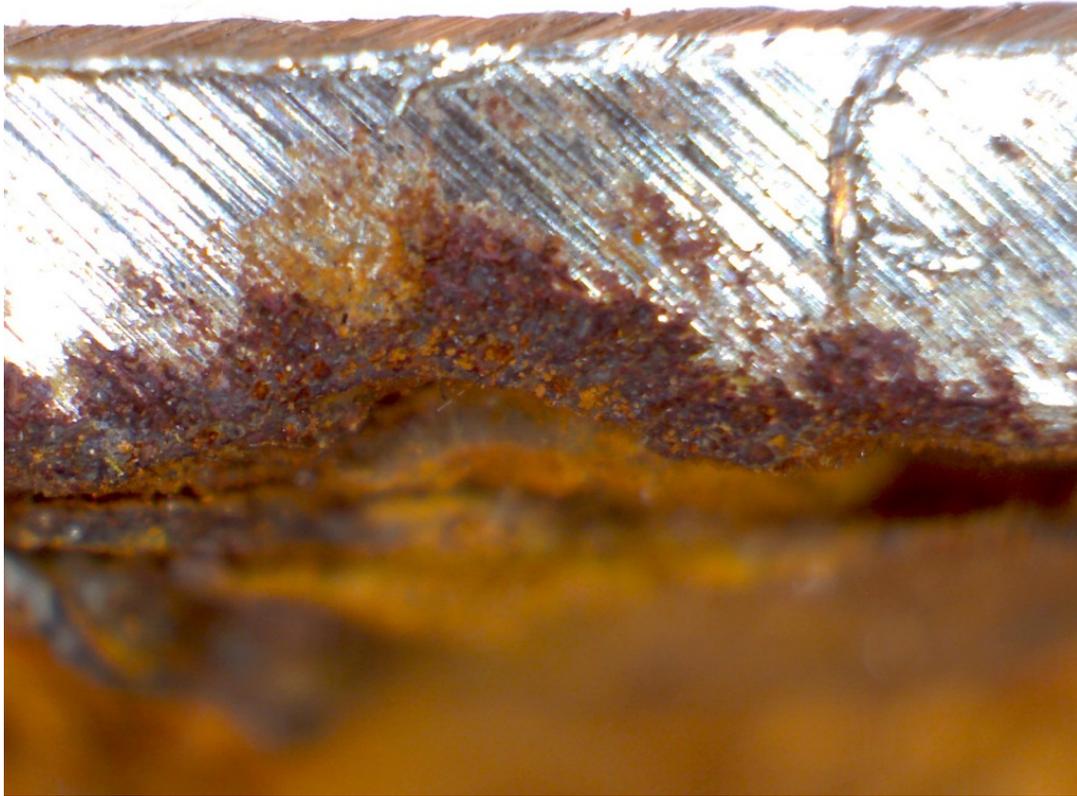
This wall section of 2 inch pipe demonstrates less than 1mm of remaining material.
